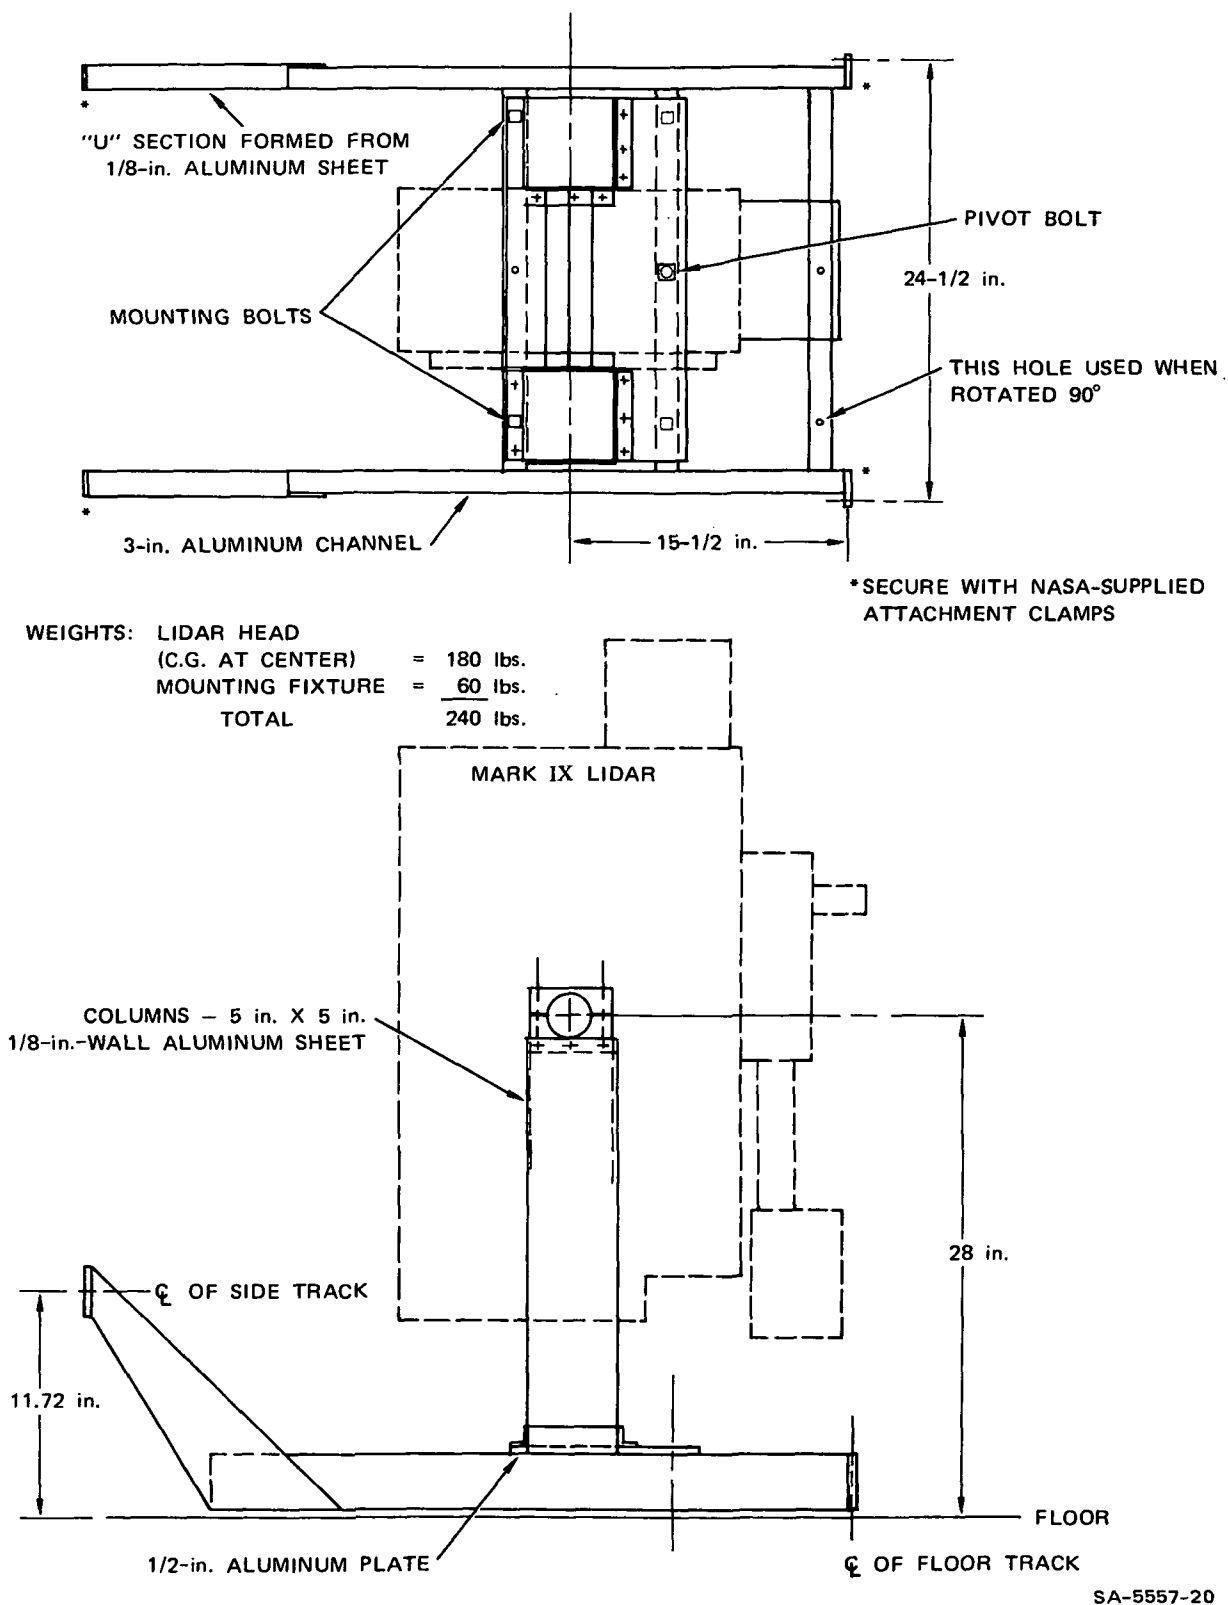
MOUNTING FIXTURE FOR MARK IX LIDAR HEAD IN NASA CV990 AIRCRAFT
